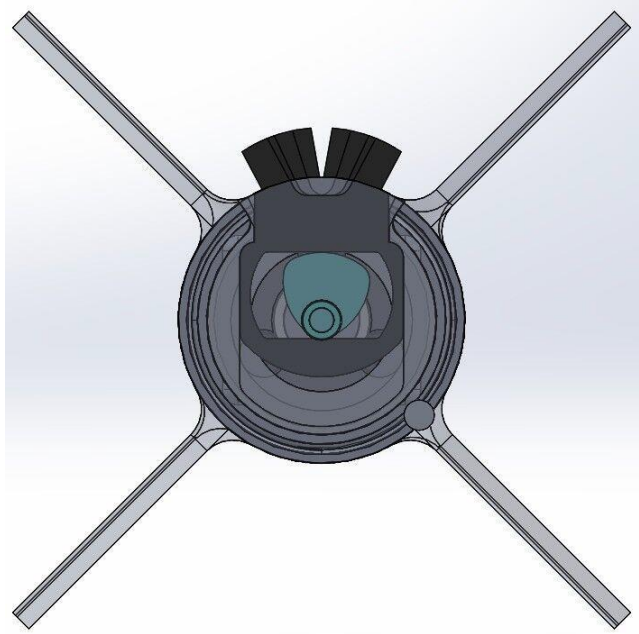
Rear View of Motor-Cam Positive Return Mechanism. Note Reuleaux triangular cam which is unique to positive return mechanism. This generates a ~90-deg activation window of the spoiler mechanism.
